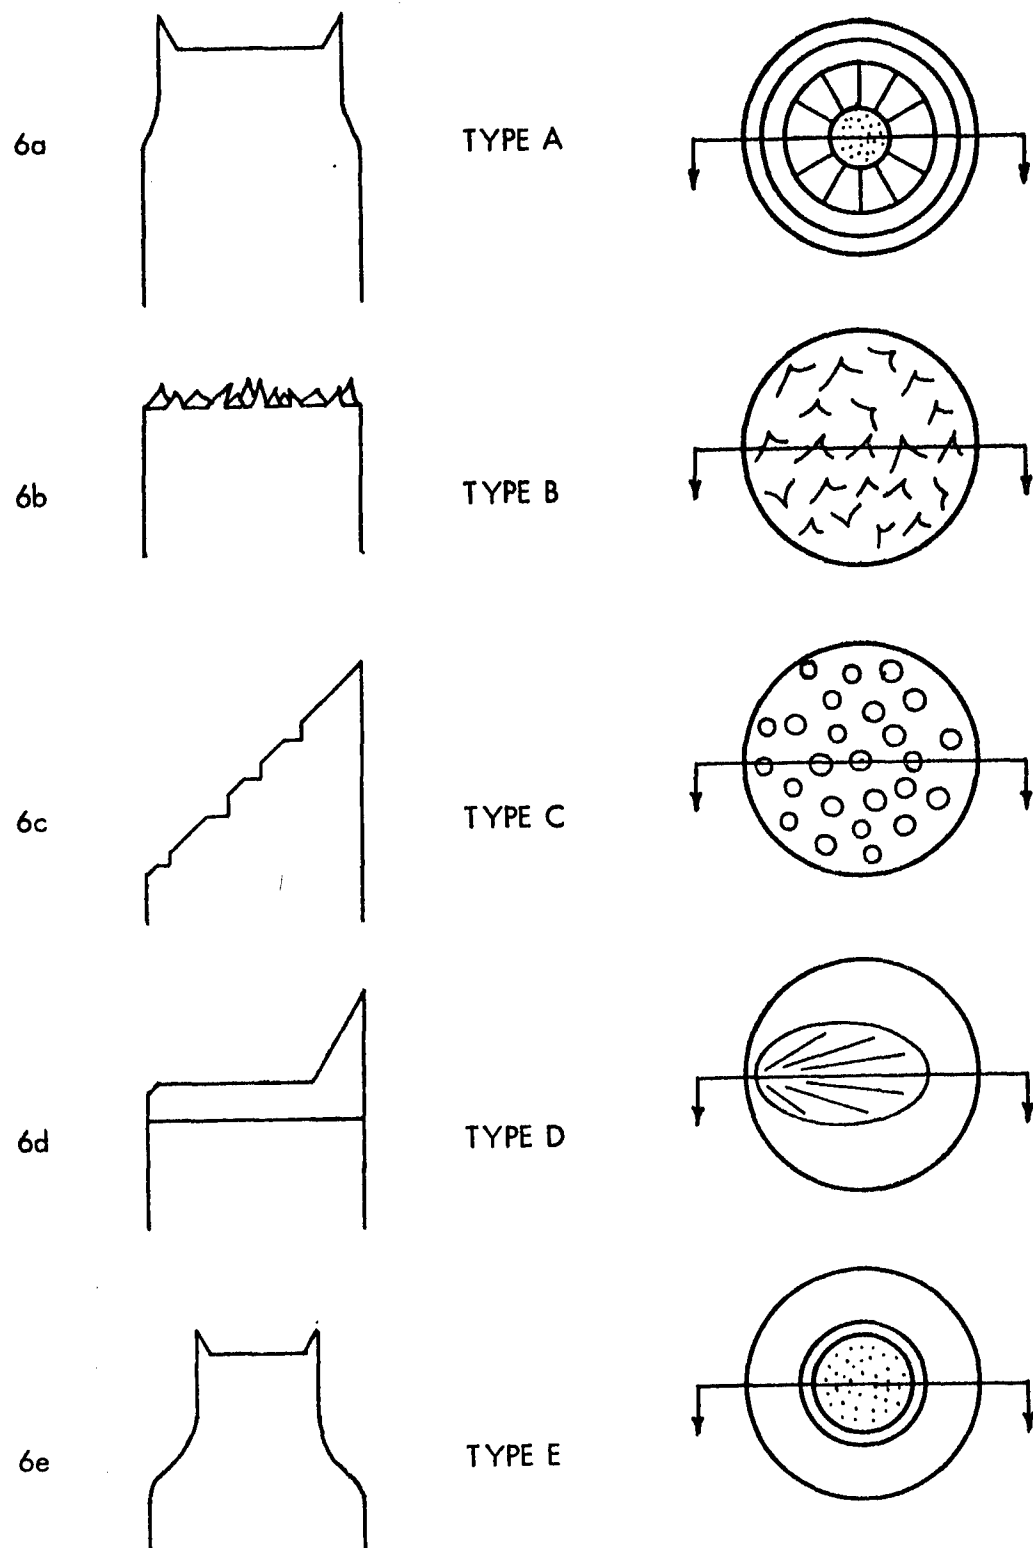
Fracture Surface Classification for Longitudinal Tensile Specimens.
